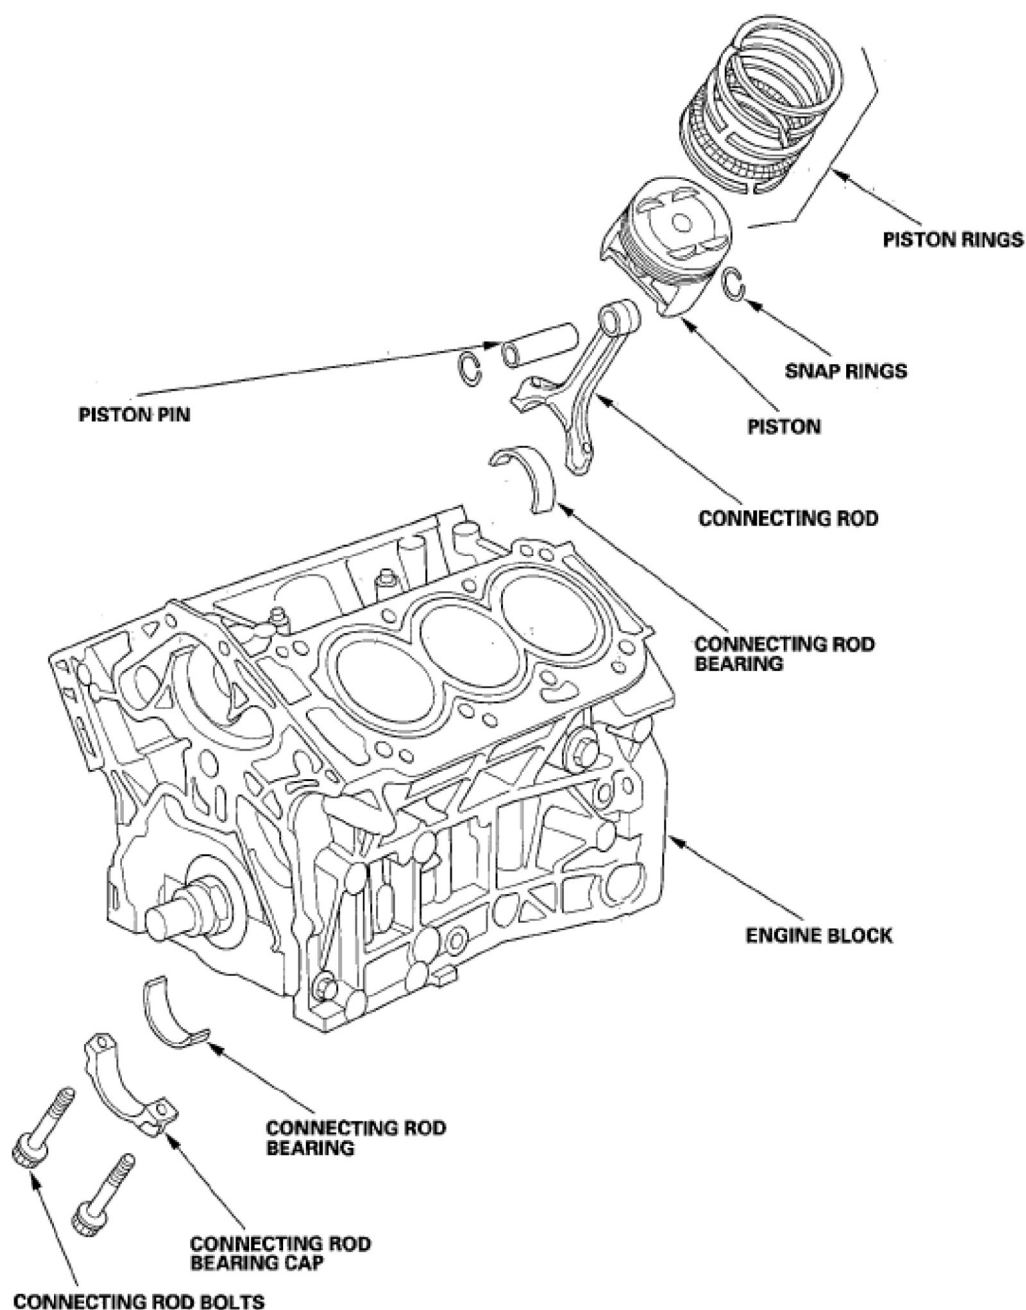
Identifying Engine Block Component Location - J35A6, J35A7 Engines
